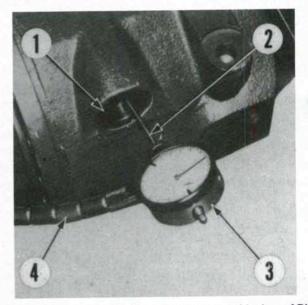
To measure ring gear to pinion backlash on APL-345 and APL-355 axles, mount a dial indicator (3) on axle housing so the plunger (2) extends through oil drain hole (1) and contacts a tooth of ring gear.
